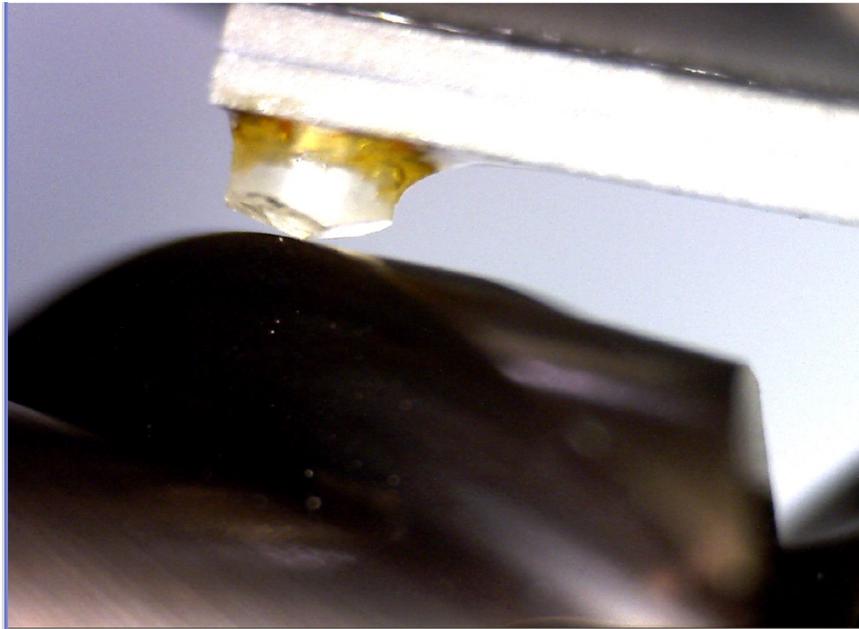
Sample #2. Photo of a milling cutter in a side-view USB videomicroscope
